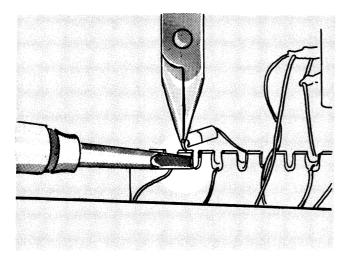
Correct method of applying heat when unsoldering or soldering to a ceramic strip.
